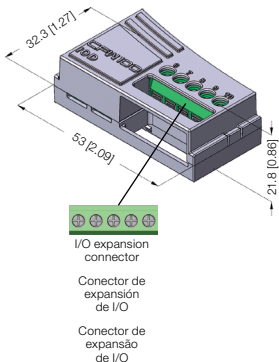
CFW100-IOD dimensions in mm [in] and connectors location
